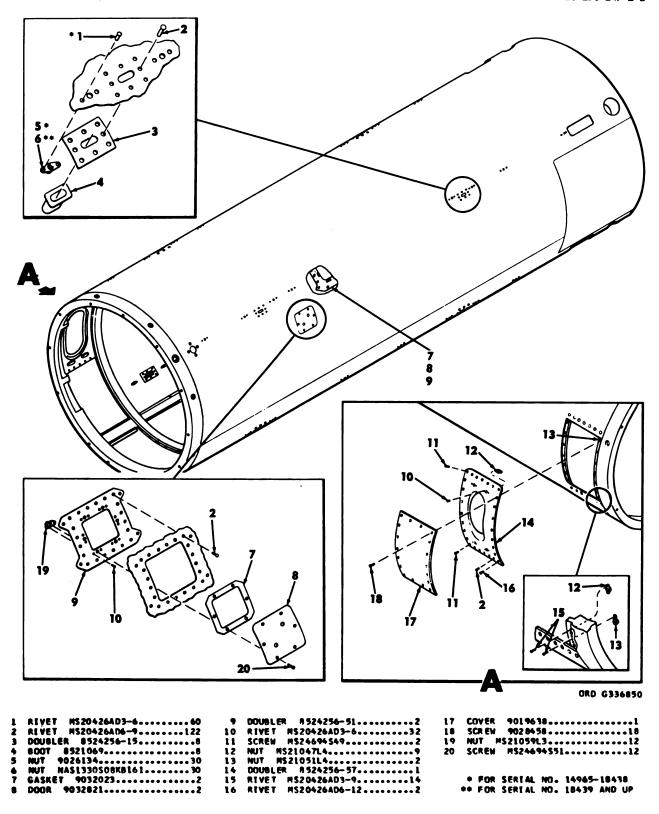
MODY SECTION, GUIDED MISSILE /8521053/ /SEE FIGURE 54 FOR NEXT MIGHER ASSEMBLY/
